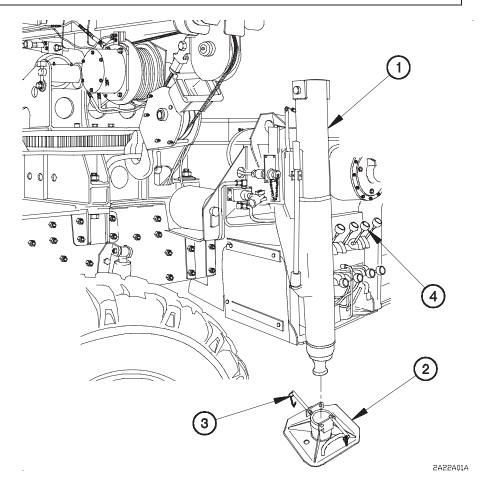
Material Handling Crane (MHC), 30K Winches, and Underlift Assembly
